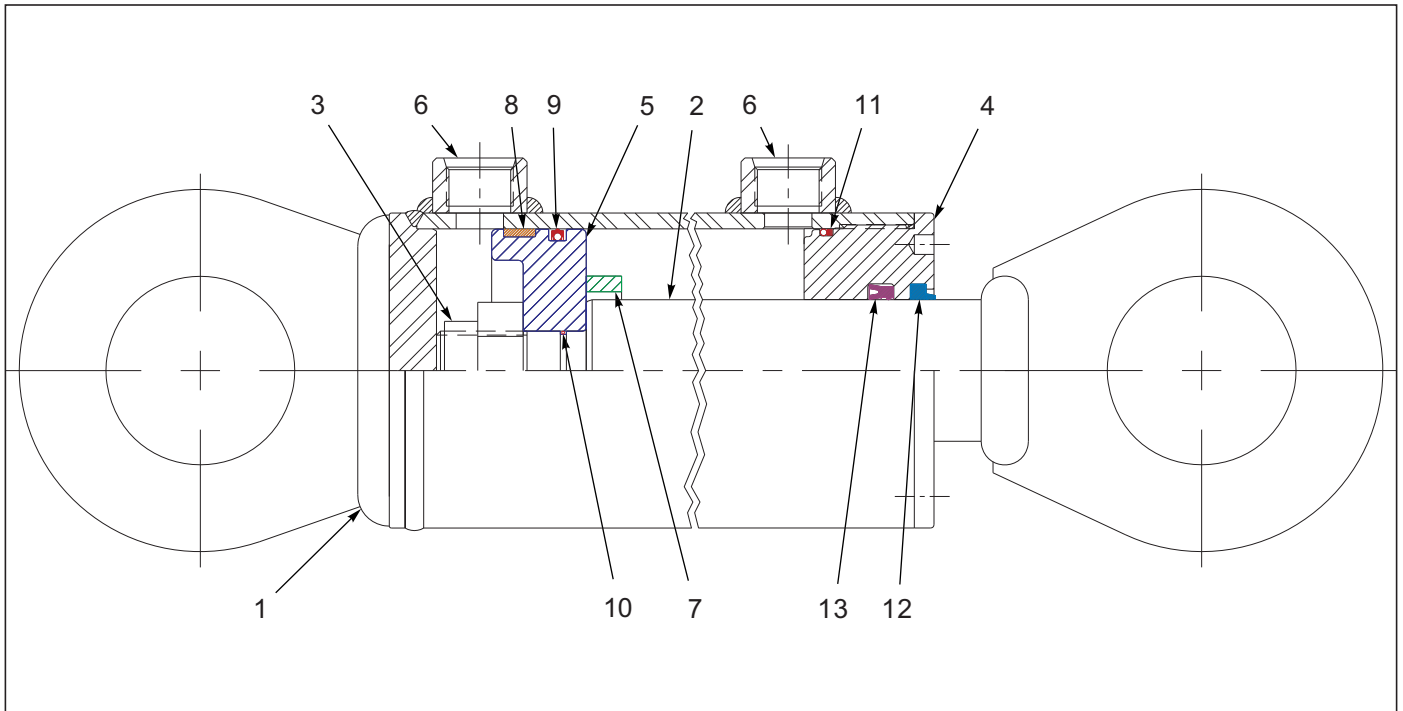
Cylinder Assembly - 4-1/2 X 32
